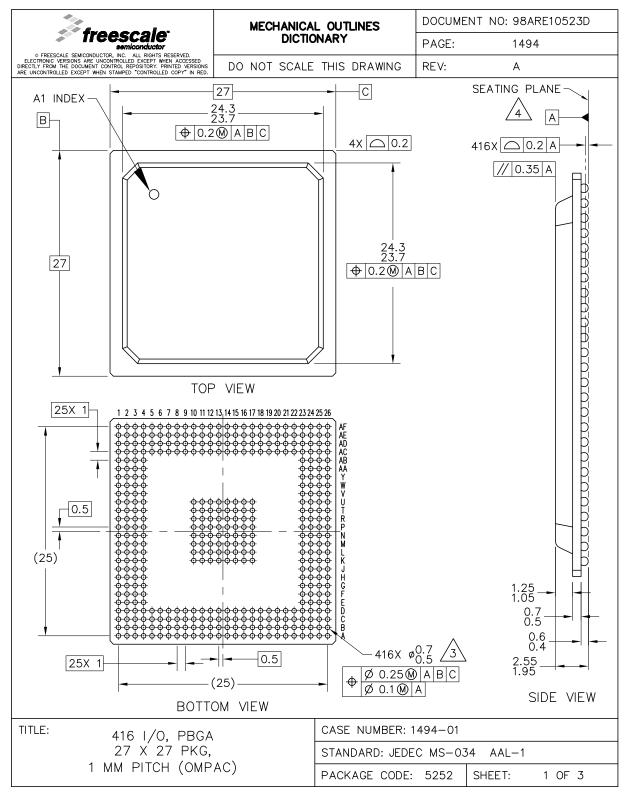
416 TEPBGA (production) package mechanical drawing (Sheet 1 of 2)
